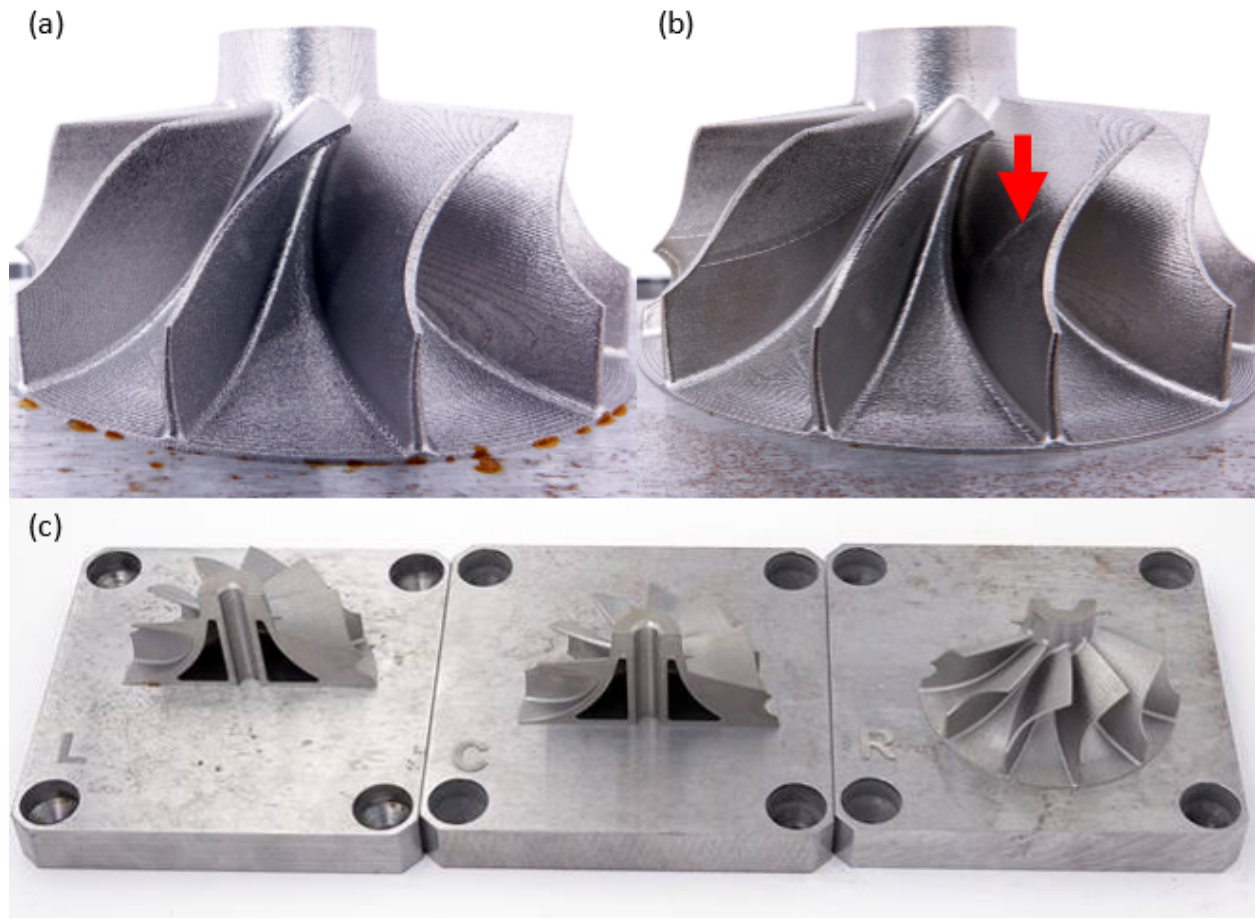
Inc 718 turbo wheels printed where a downskin parameter (a) is not applied and (b) is applied and (c) the full print layout displaying the hollowed geometry.
